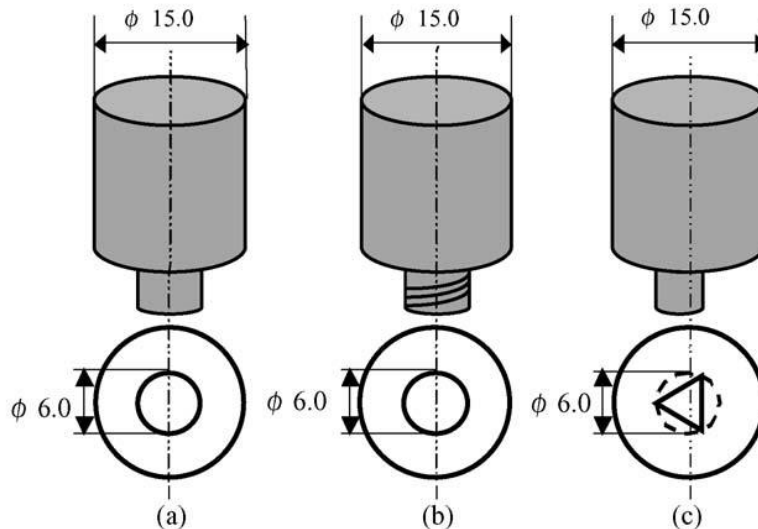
FSW Tool shape: (a) non-threaded pin, (b) threaded pin, (c) triangular prism. ([Fujii et al., 2006](#))
